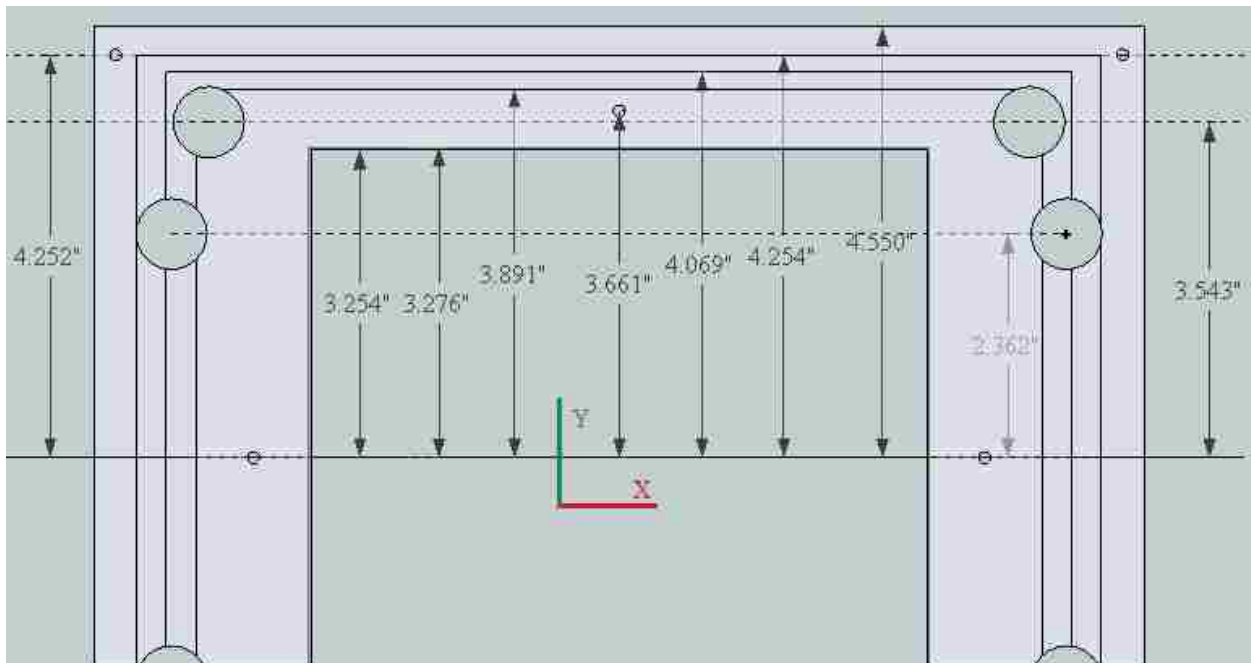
Top view of the 20x20 cm² upper trimmer lead plate illustrating the in-plane dimensions.
